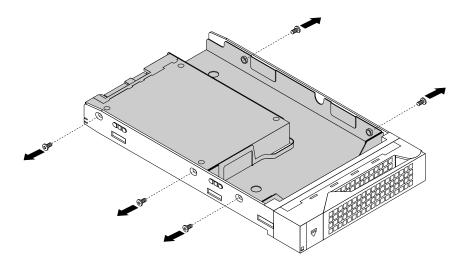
Removing the screws that secure the solid-state drive and the drive adapter
